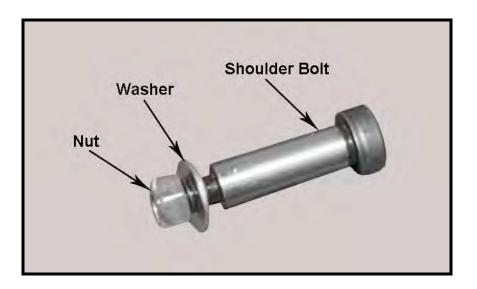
Hardware for Mounting Hydraulic Cylinders
